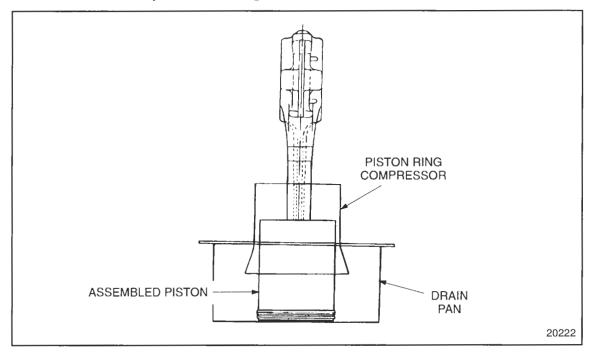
Installing Piston and Connecting Rod Assembly into Ring Compressor
